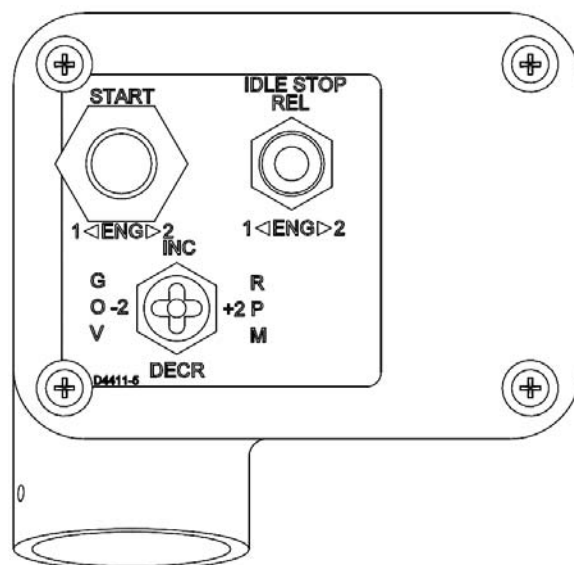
D212-803-015/-017 Co-Pilot Collective Head Front View
